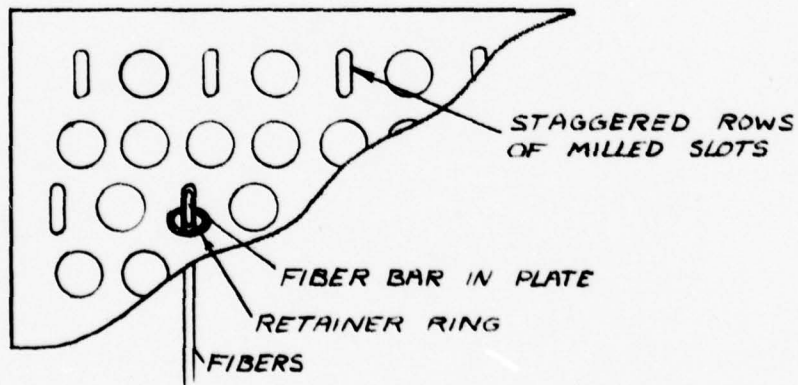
FIBER BAR AND SUPPORT PLATE CONSTRUCTION
